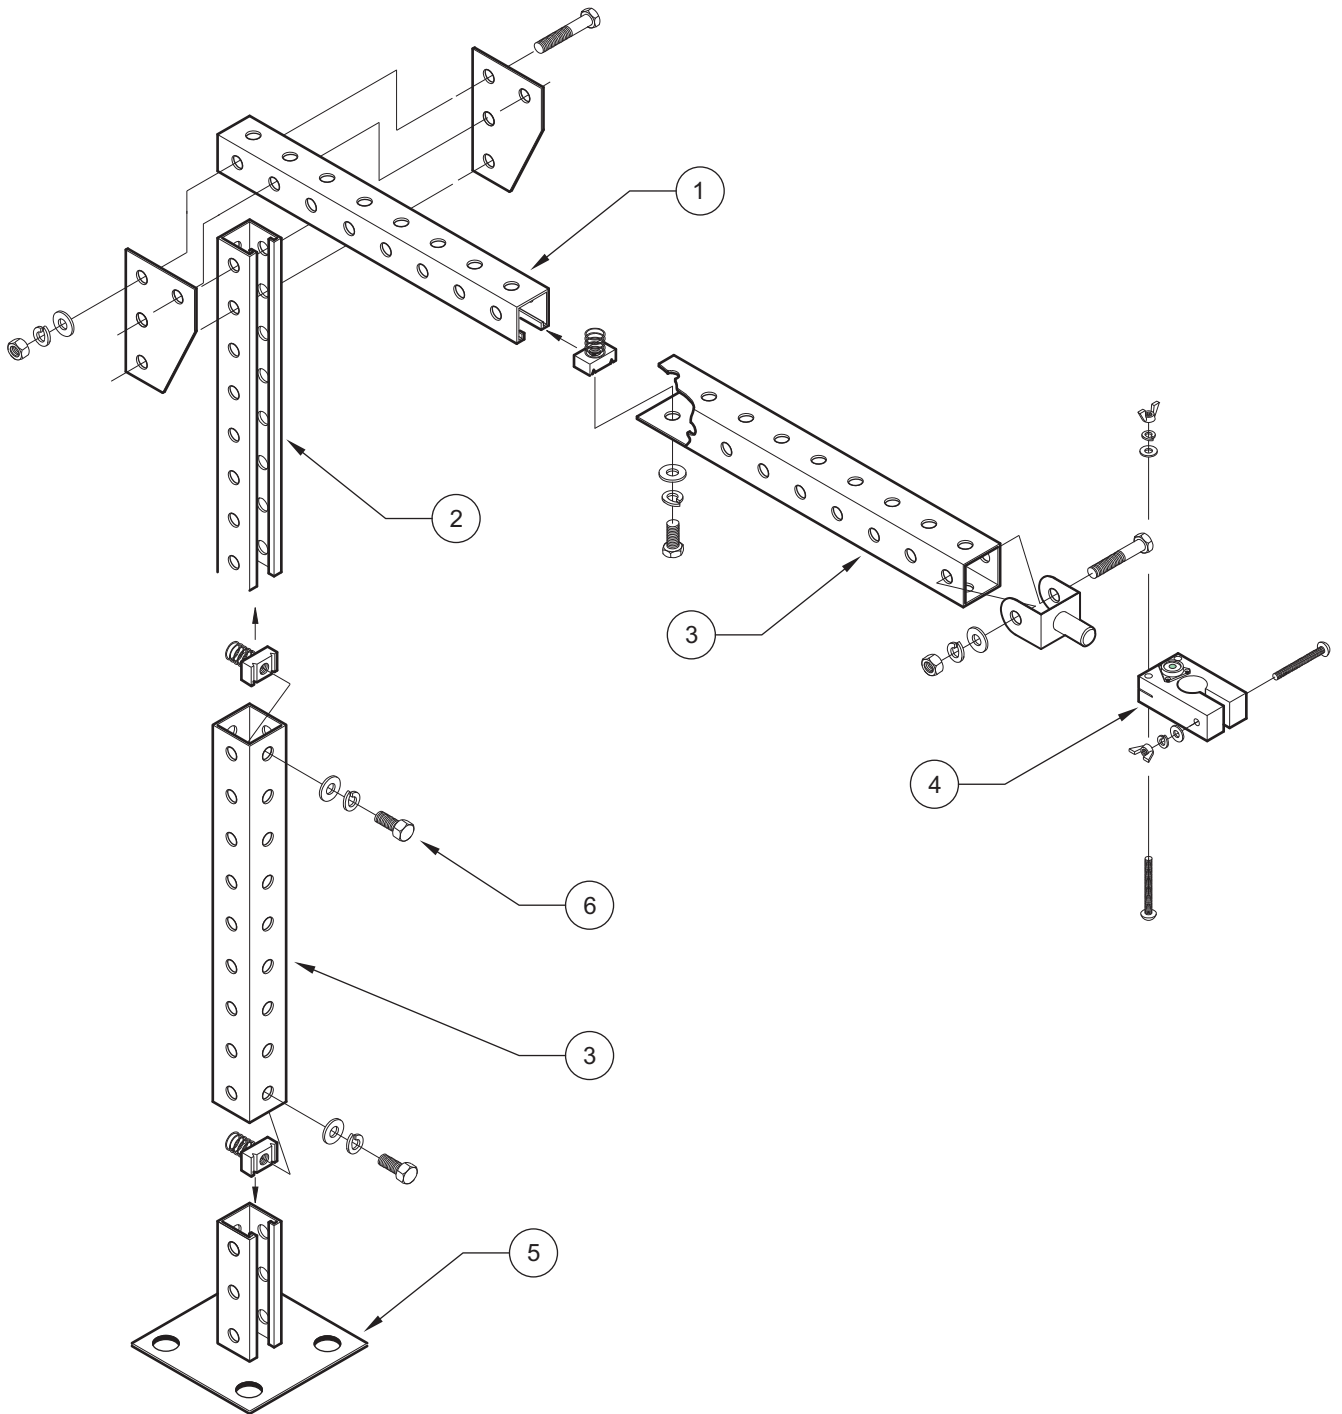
Adjustable Mounting Bracket (Cat. No. 2904)
